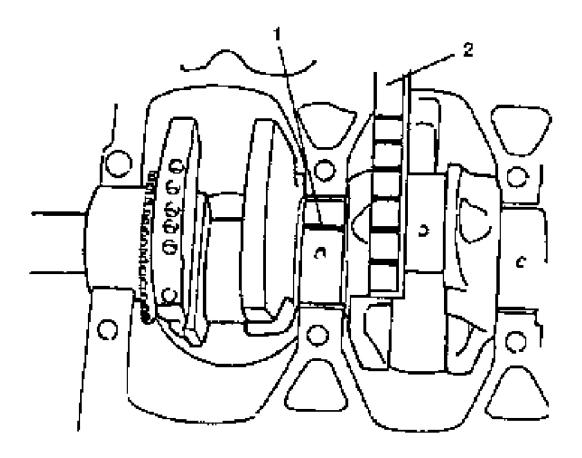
Inspecting Main Bearing Clearance Courtesy of SUZUKI OF AMERICA CORP.
